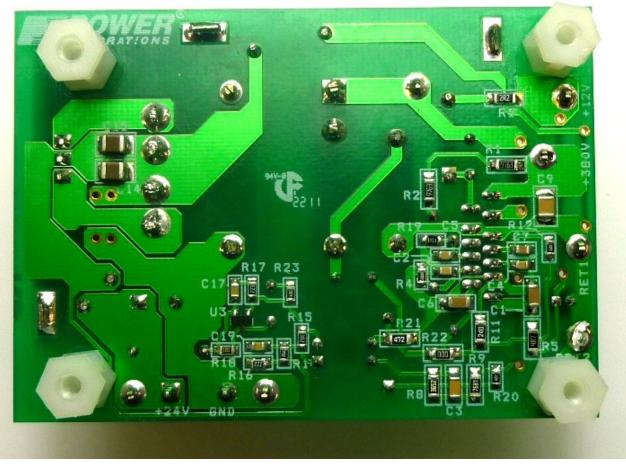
Populated Circuit Board Photograph, Bottom View.
